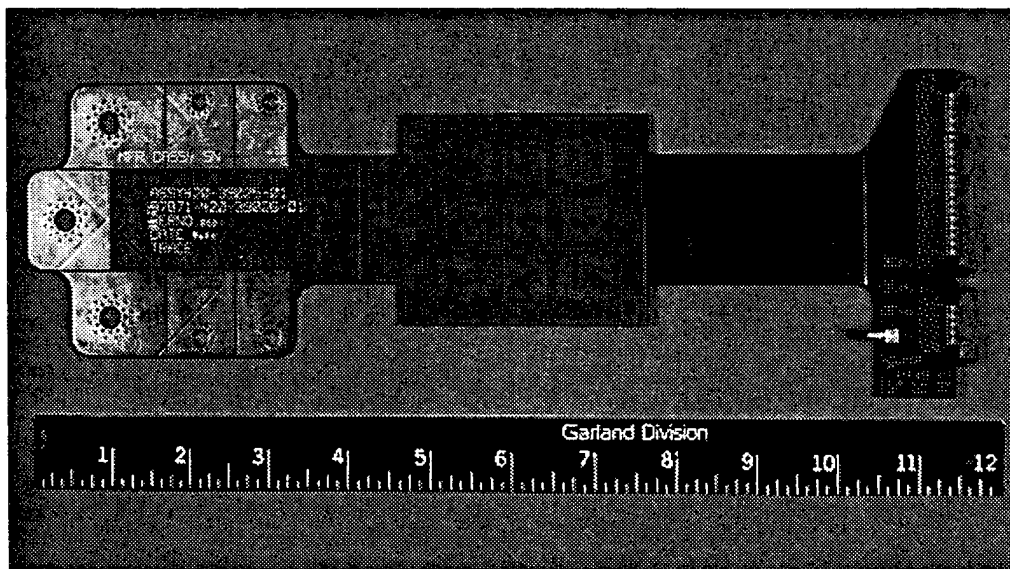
Photograph of Completed Rigid/Flex Circuit Board
